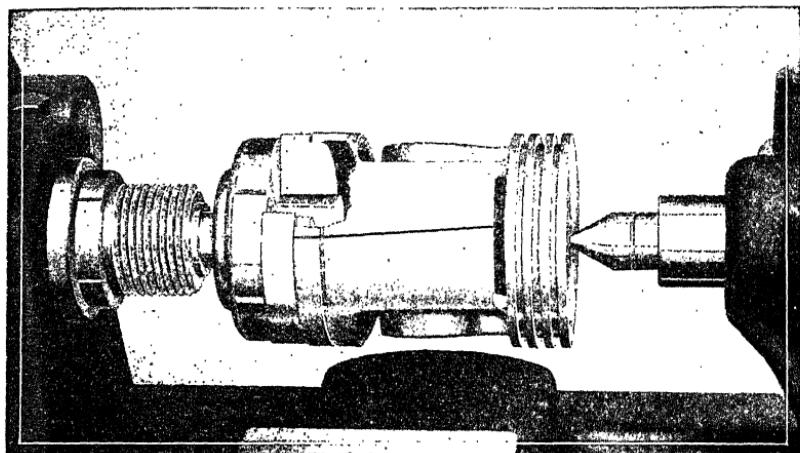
A Special Mounting Collar Is Needed When Turning Split-Skirt Pistons
